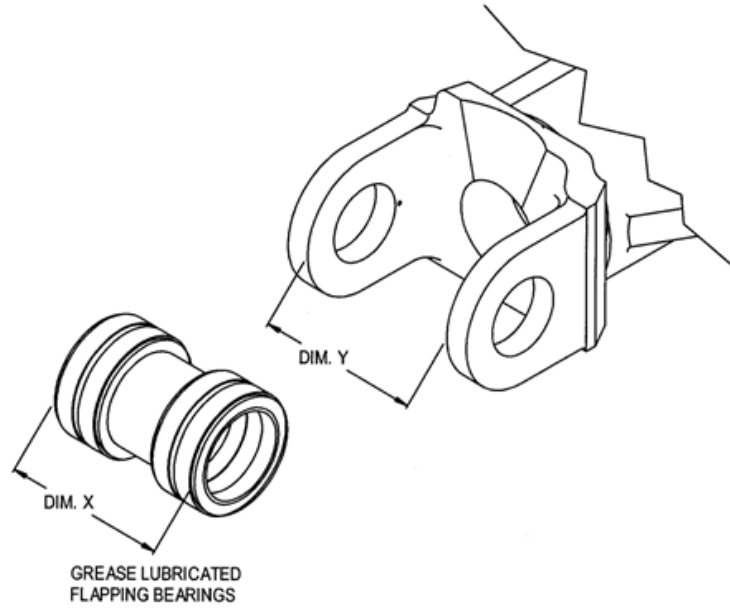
Flapping Bearing and Spindle Dimension Check
